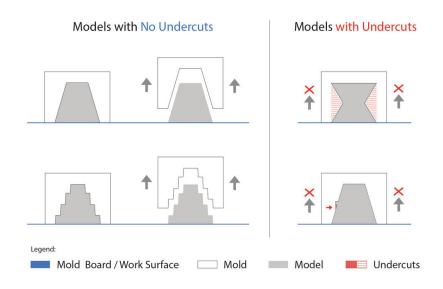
An undercut will prevent the part from being removed from the mold [15]
